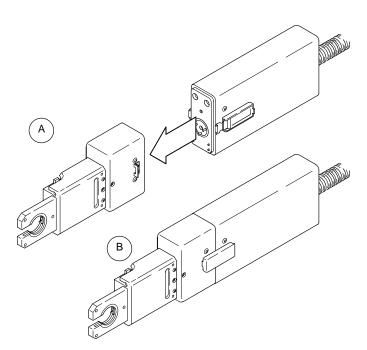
Connecting Weld Head and Motor Module
